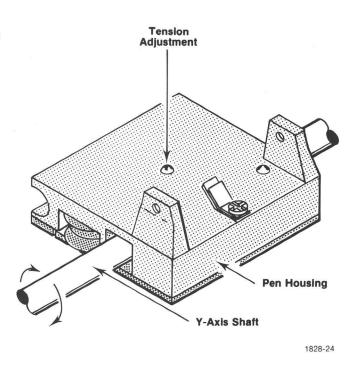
Pen Housing and Slide Tension Adjustments.
